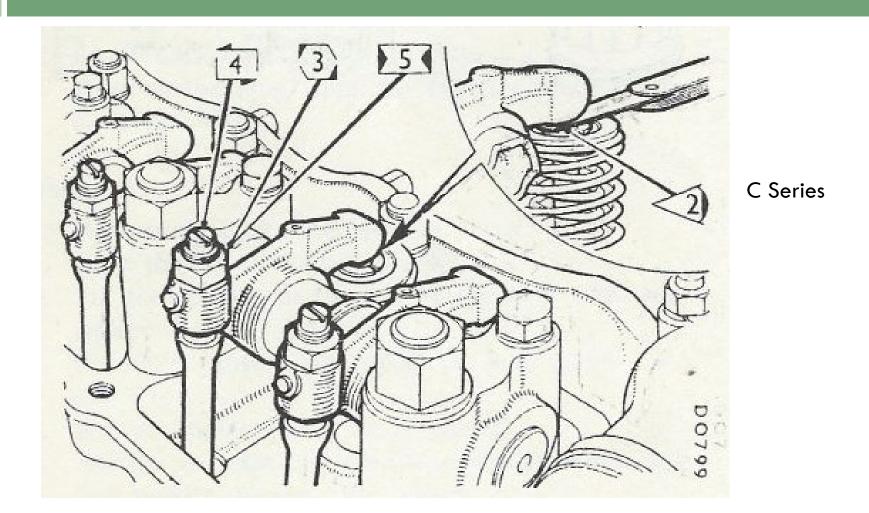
The method of adjusting the valve rocker clearance and the correct position for measuring it
